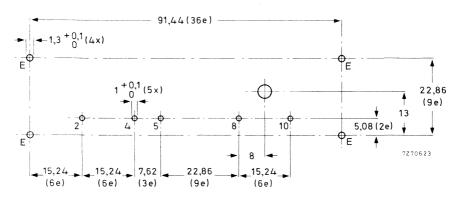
Piercing diagram viewed from solder side of board; e = 2,54 mm (0,1 in)
